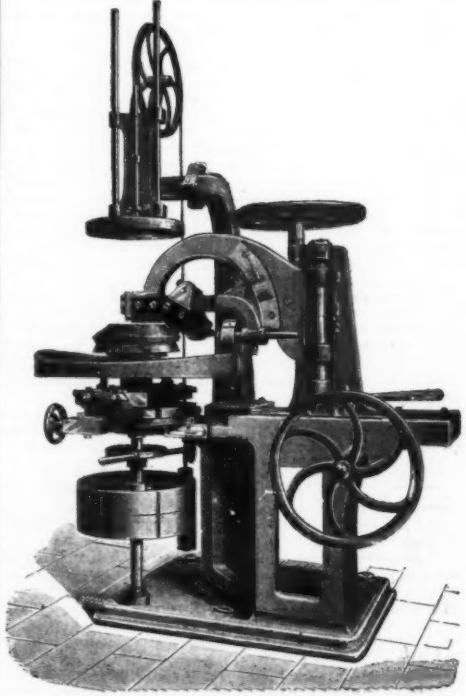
MACHINE FOR MAKING OVAL DISHES.
